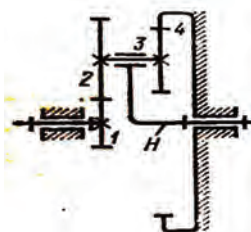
Planetary gear (gearbox): 1, 4 □ central wheels; 2, 3 □ planetary wheels; H □ the gear carrier
